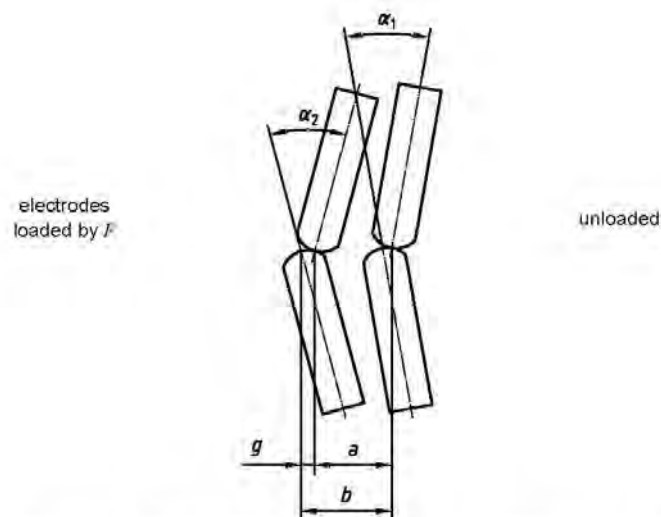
Contact fault of spot and seam welding equipment
